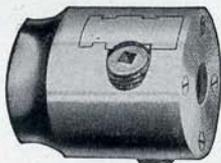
2-Jaw Drill Chuck 1/2-in. Capacity Cat. No. 1301. Price....\$10.00
